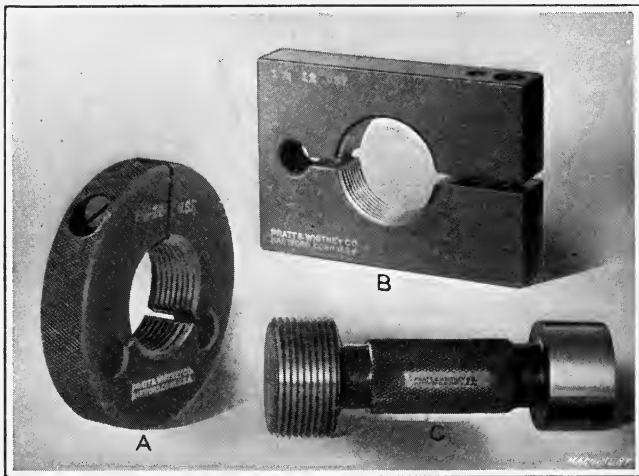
Standard Ring Thread Gages and a Standard Plug Thread Gage
